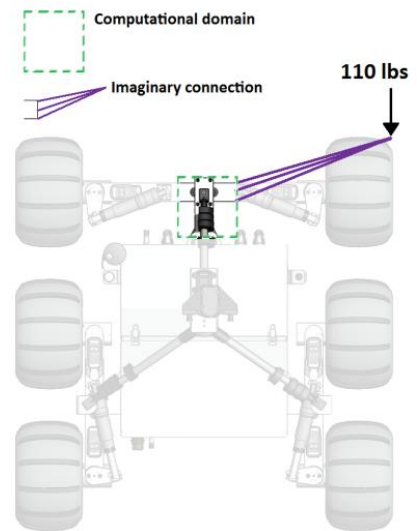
Worst-case scenario load for rear bogie hinge assembly.
